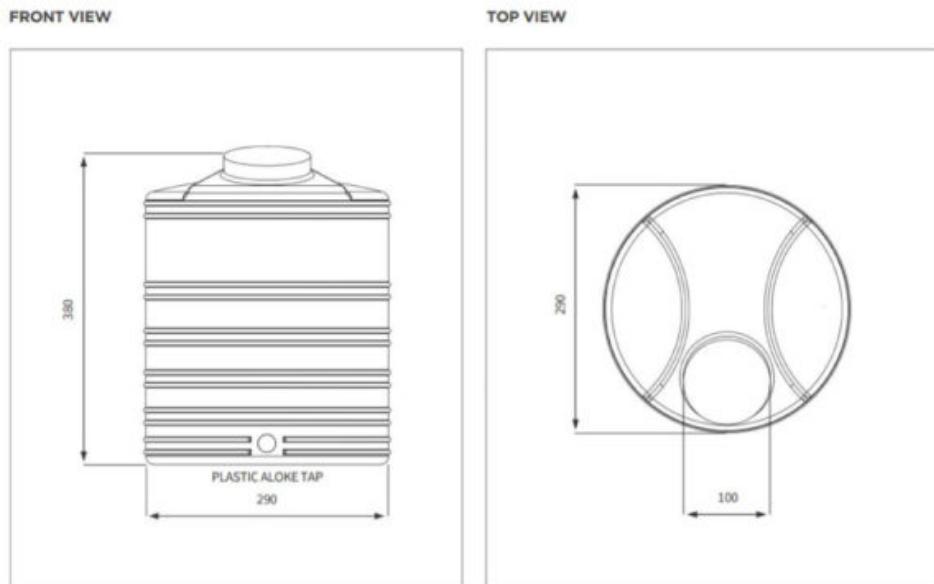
CAD drawing depicting Jojo tank size and dimensions.
